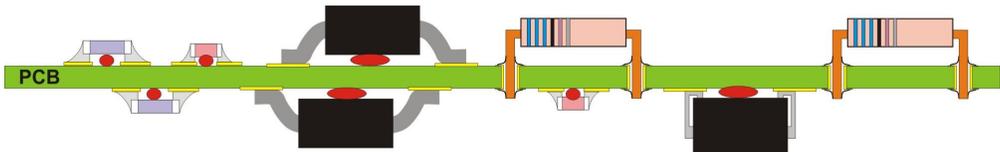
Two-sided PCB with SMD and TH components prepared for wave soldering
